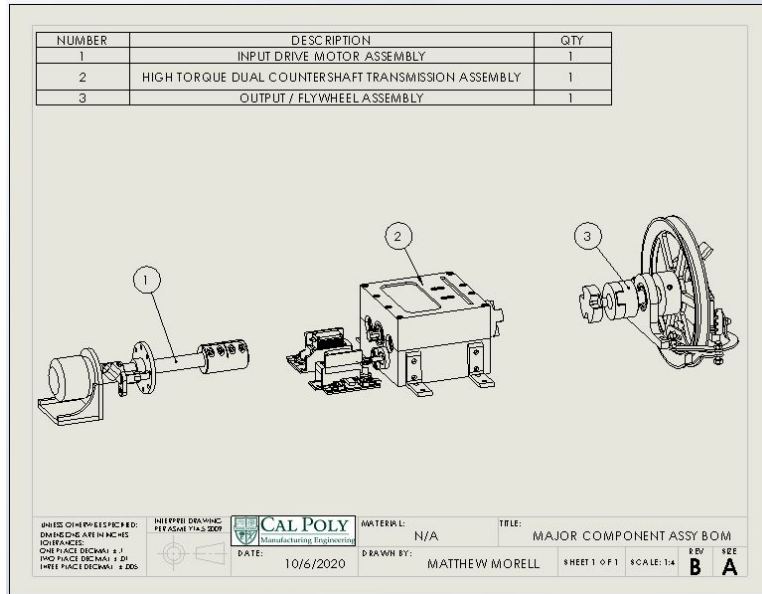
Assembly of the Three Main Sub-Assemblies
